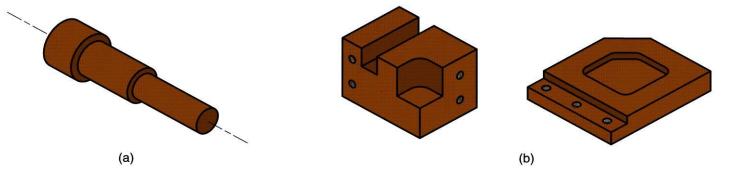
Machined parts are classified as: (a) rotational, or (b) nonrotational, shown here by block and flat parts.
